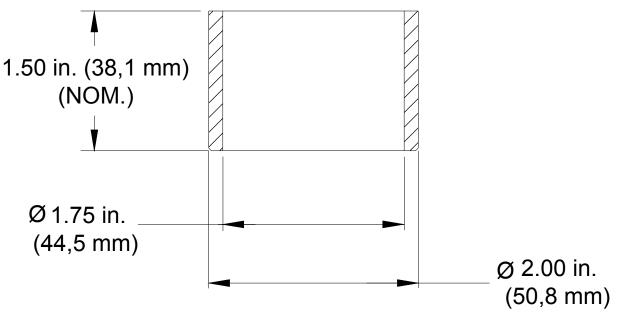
Drive End Bearing Hub Support (Outboard)
